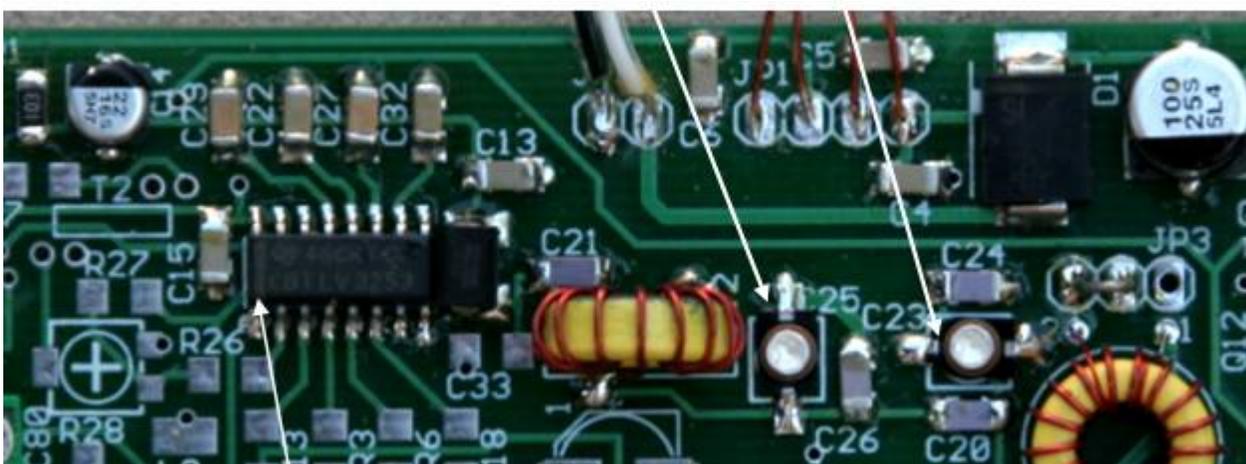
Location of RF front end band pass filter adjust trim caps, C23 and C25 on top middle of the board
